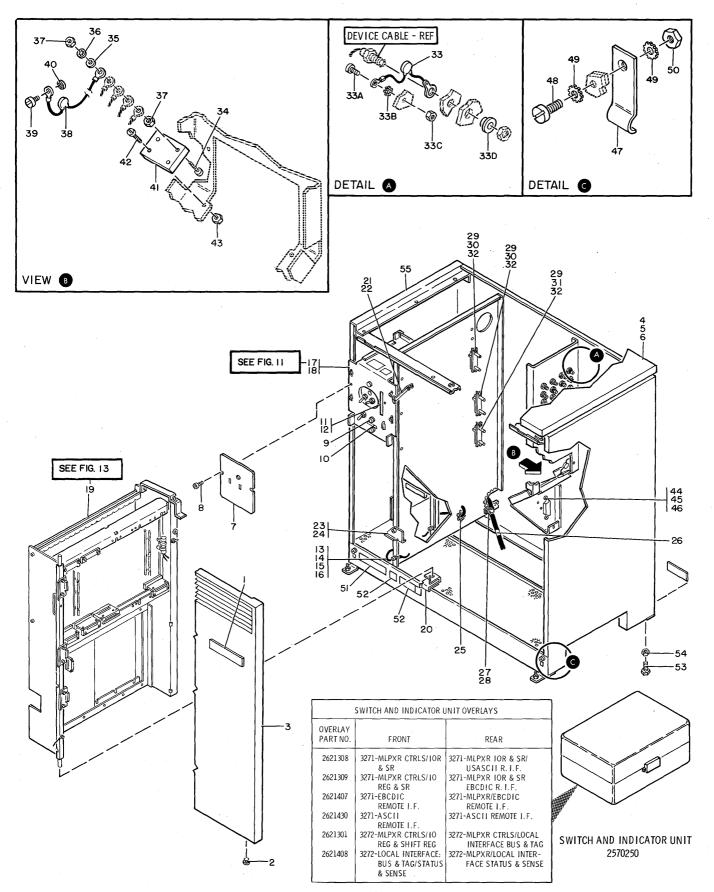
3271 M1/M2 AND 3272 M1/M2 FINAL ASSEMBLY.
